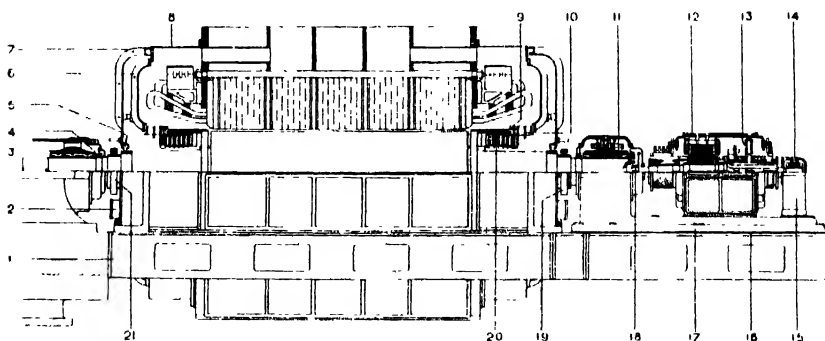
Half Sectional Elevation of a Typical B.T.H. 3,000 r.p.m. Turbo-alternator and Exciter.
